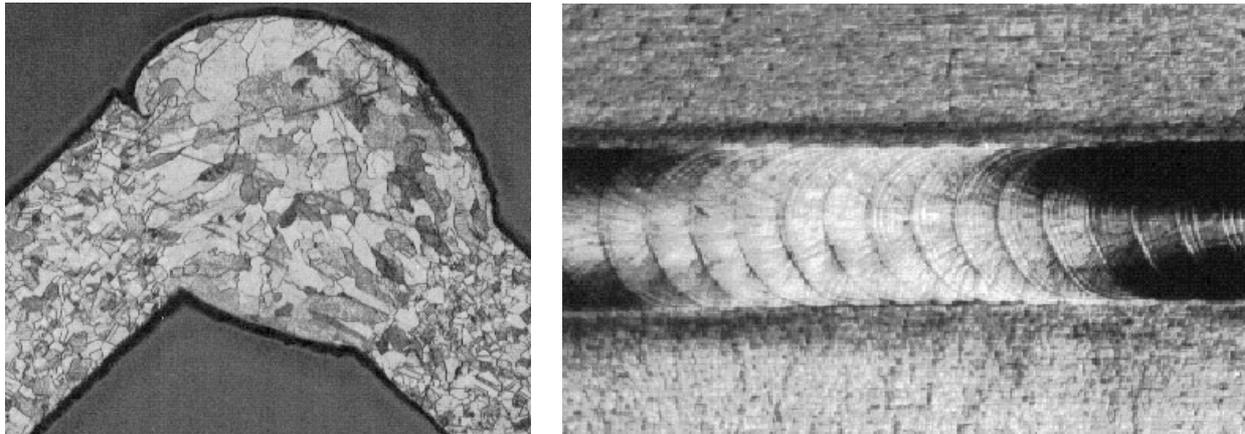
a) cross section of laser weld between two perpendicular foils of $200 \mu\text{m}$
